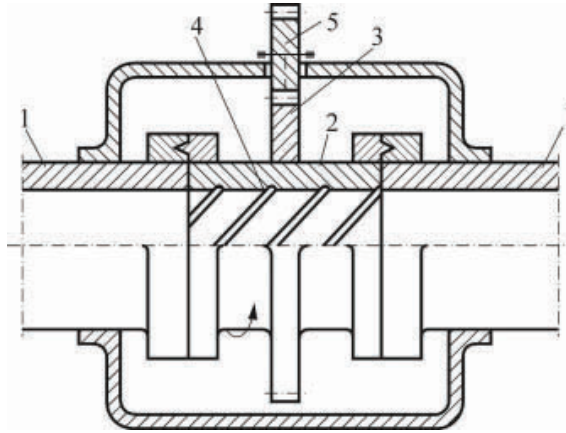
The look of a part of the laboratory autothermal extruder with an active grooved feed section with helical grooves; 1 – barrel segment cover, 2 – twisting mechanism cover, 3 – hopper for the plastic, 4 – drive gear
